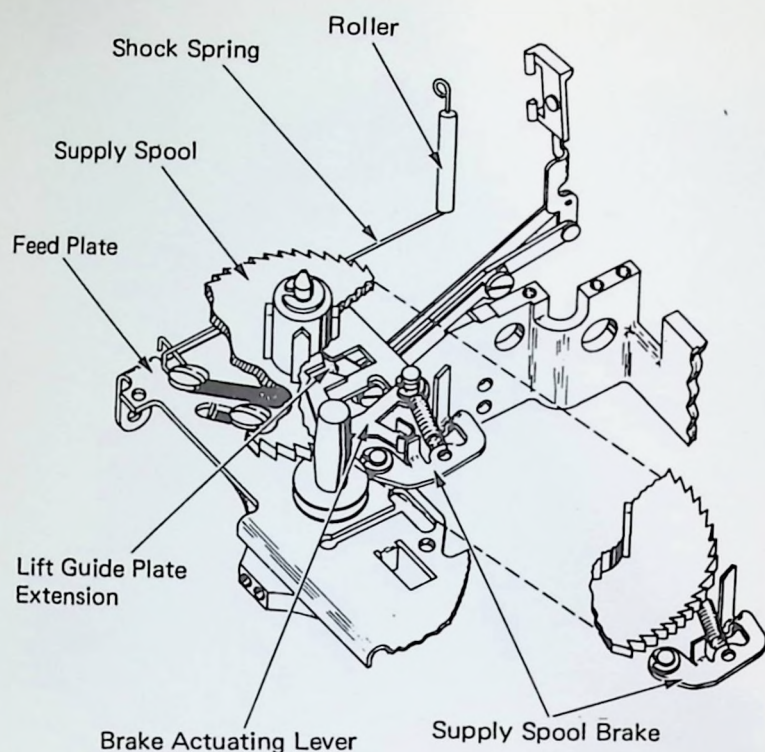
Ribbon Shock Spring And Brake Actuating Lever
